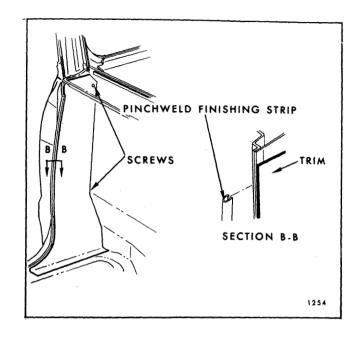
Rear Quarter Trim Assembly - "A-80" Styles
